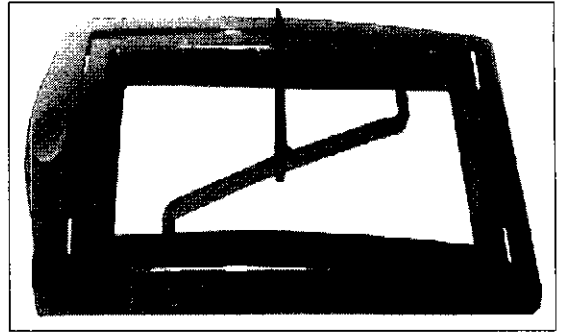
Plastic door panel produced by injection molding process using the side gate type
